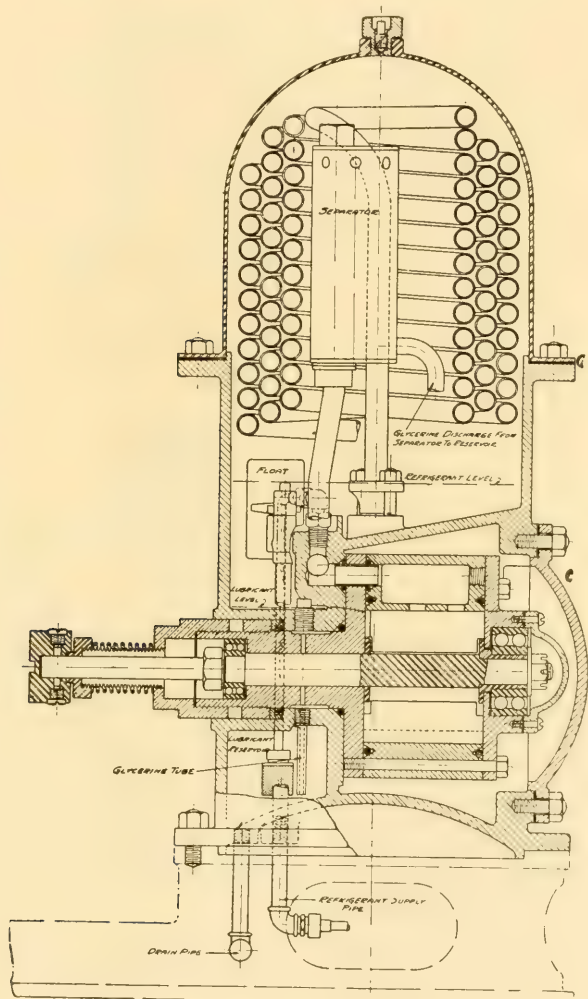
WILLIAMS REFRIGERATING MACHINE.
